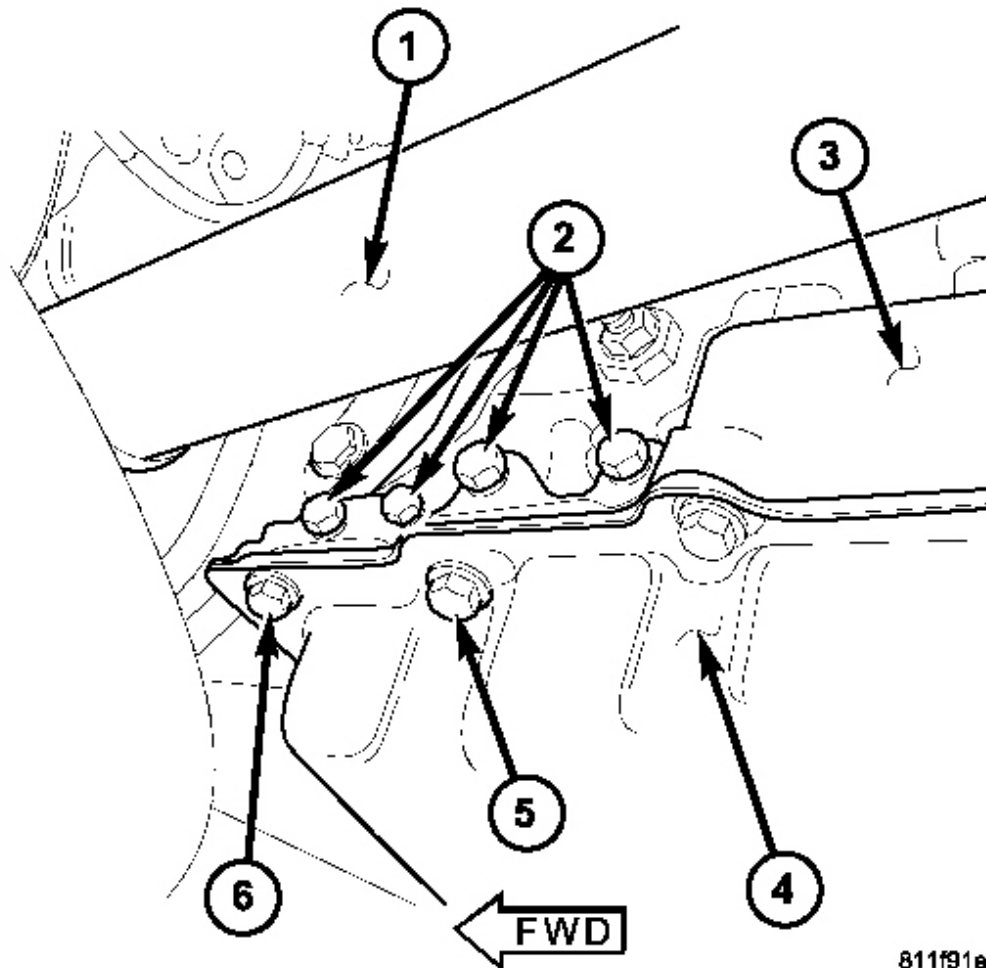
Locating Oil Pan Bolts & Pressure Ports
